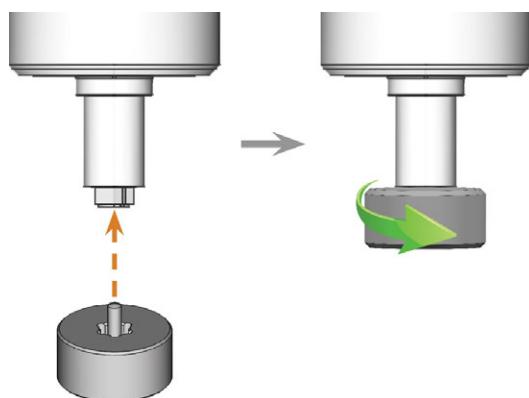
TIGHTENING THE COLLET CHUCK WITH THE KNURLED NUT; RECESS IN KNURLED NUT MARKED ORANGE
